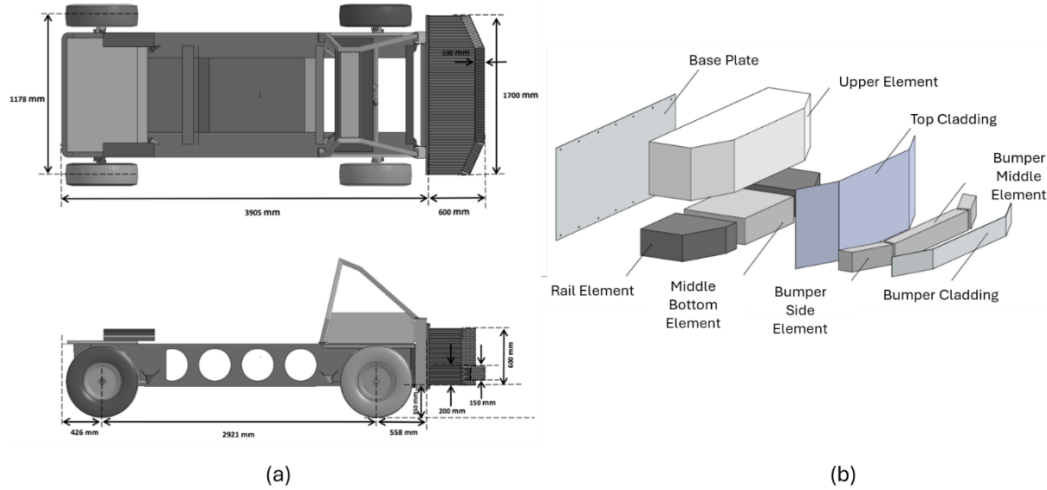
IIHS 2.0 side impact deformable barrier- (a) Barrier mounted on trolley (b) Exploded View [14].
